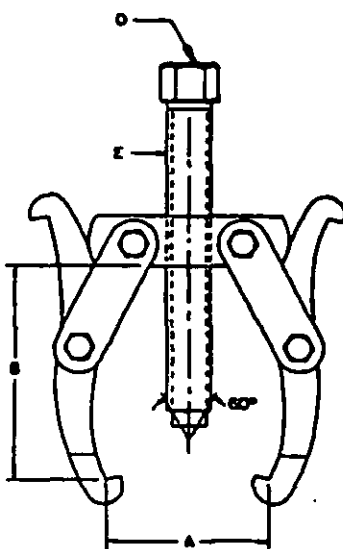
Type I, class 1, style B, puller, mechanical, gear and bearing, two-jaw, external, double end grip. (See Table 1 for size specification.)
